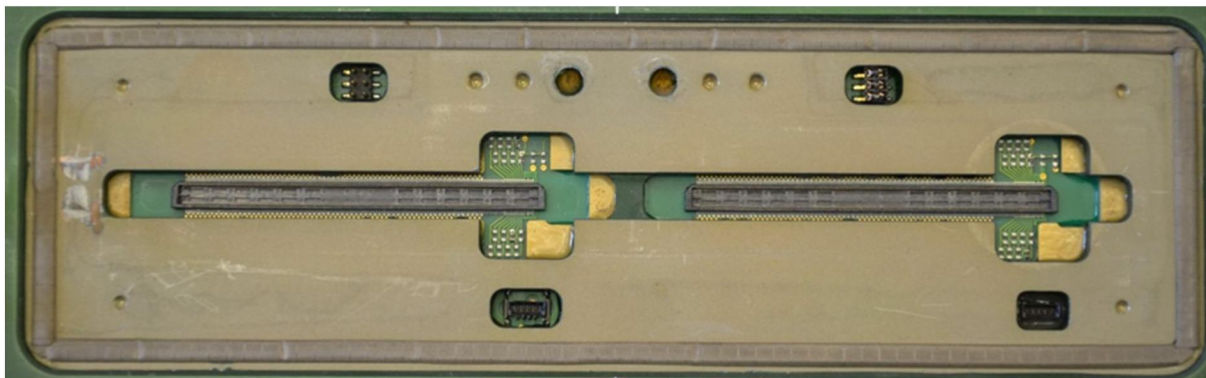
Picture of two adjacent high-density read-out connectors mounted on the back-side of the Pad-plane PCB (the copper cooler has been removed for that purpose).
